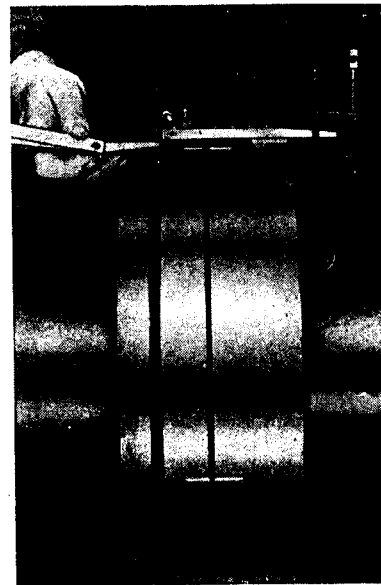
Checking the radial alignment with micrometer screw and feeler gauges
